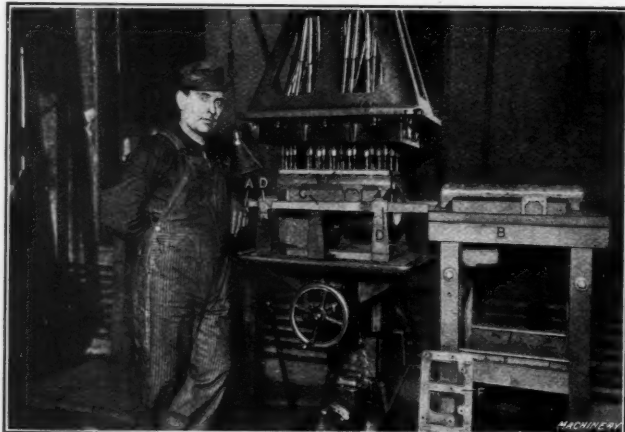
Drilling Jig and Fixture used in National Multiple Spindle Drill for drilling Twenty-five Holes in the Top Faces of Crank-cases
